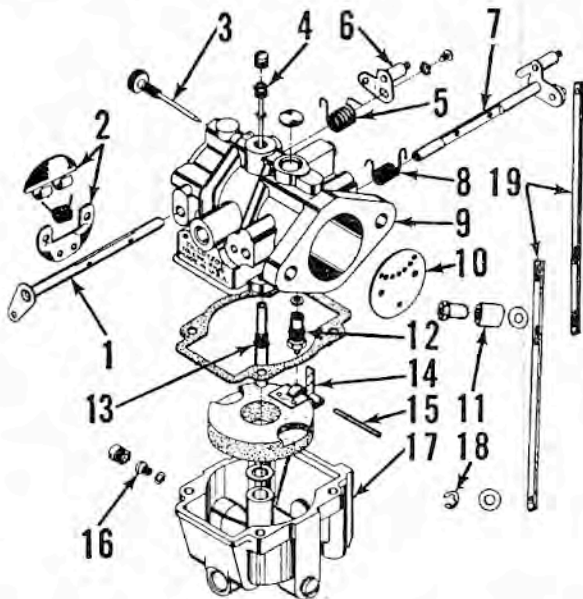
Exploded view of Tillotson model OM carburetor and linkage used on Tiger Shark.
